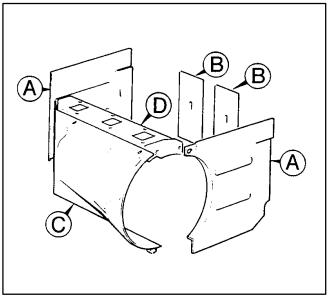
COOLING SYSTEM AIR COWLING PANELS
